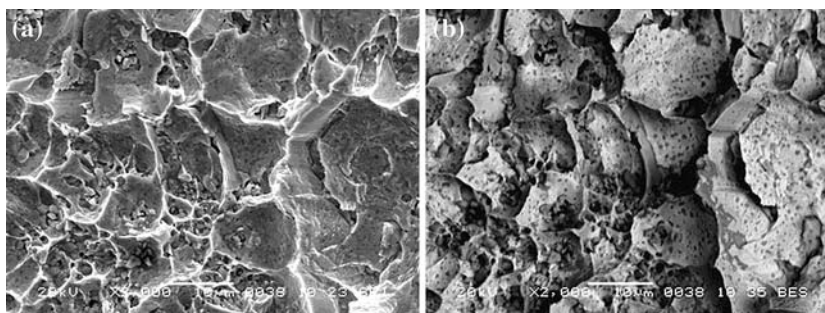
Fracture surface in Sn-37Pb/Ni-P solder joints aged at 150°C for 625 h. The fracture occurs near the interface, but mainly stays in the solder. The IMCs are only visible at some spots. (a) SE SEM micrograph of fracture at solder/ Ni_3Sn_4 interface, substrate side; and (b) BE SEM micrograph of (a), showing Pb-rich phase in light color.
